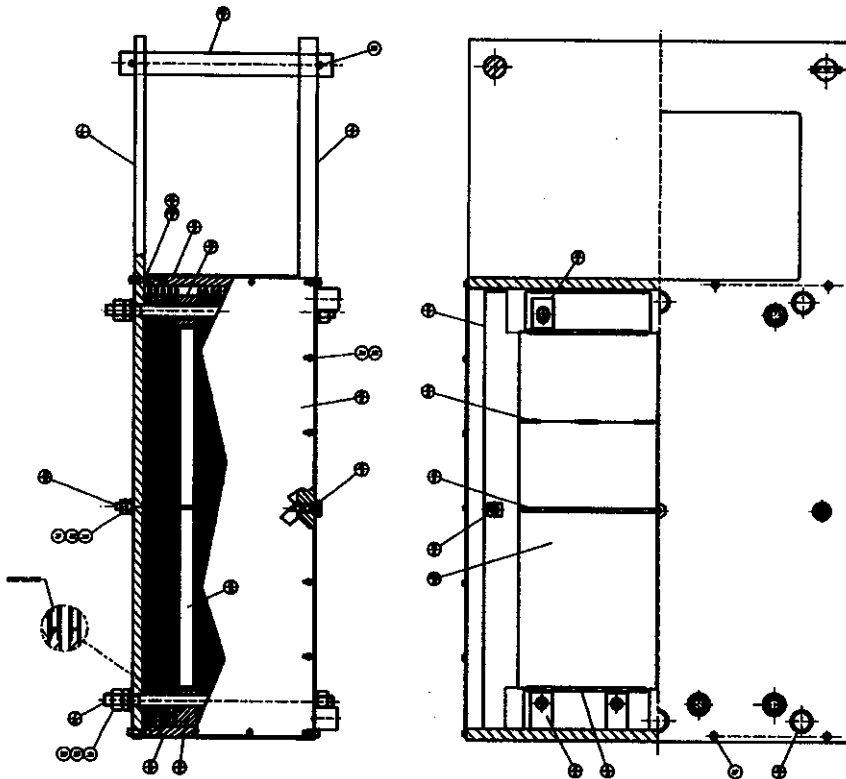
The assembly drawing giving the side and front views of the prototype EMC for STAR being built at the NSCL.
